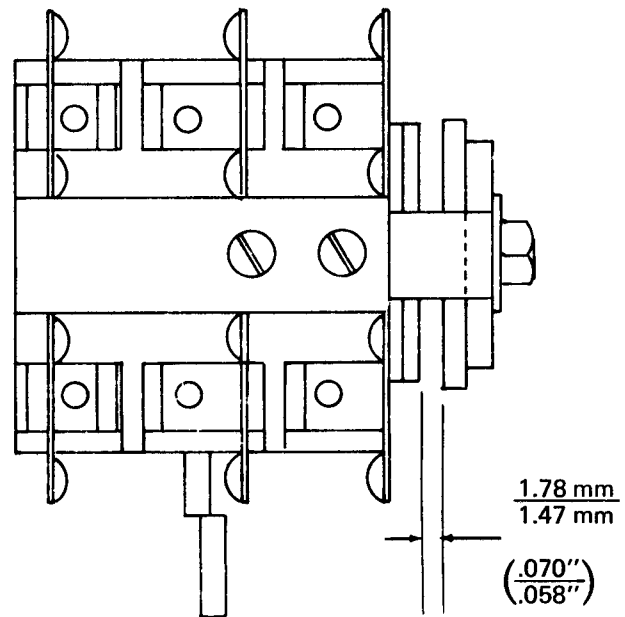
Armature Frame And Coil Pole Bracket Gap
